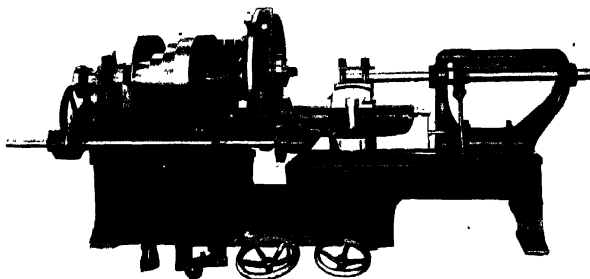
Lathe with chuck for oval work, and with screw-cutting attachment
